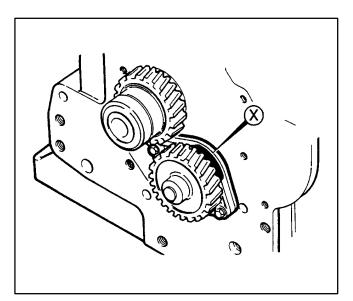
OIL PUMP LOCATING CUTOUT
